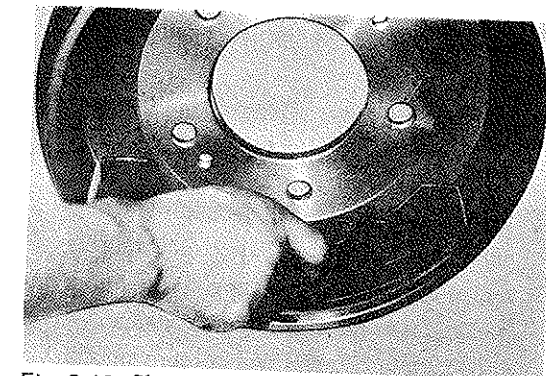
Checking Brake Shoe-to-Drum Contact
